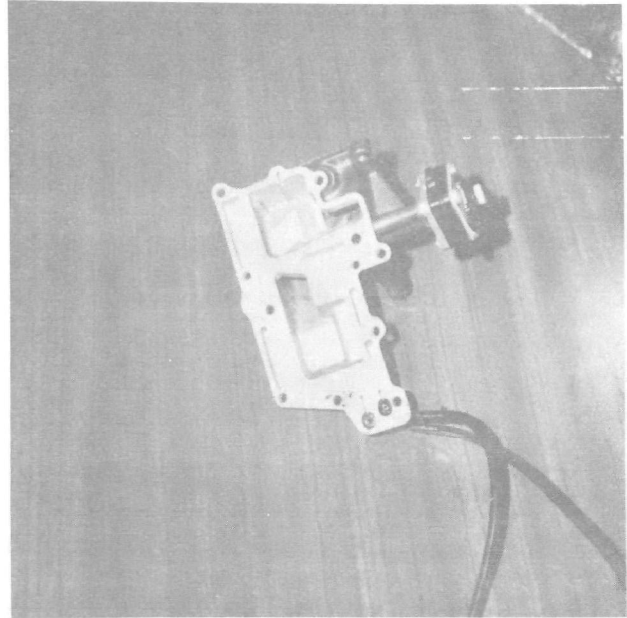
Modified inlet manifold used for tests on engines 24 and 27
